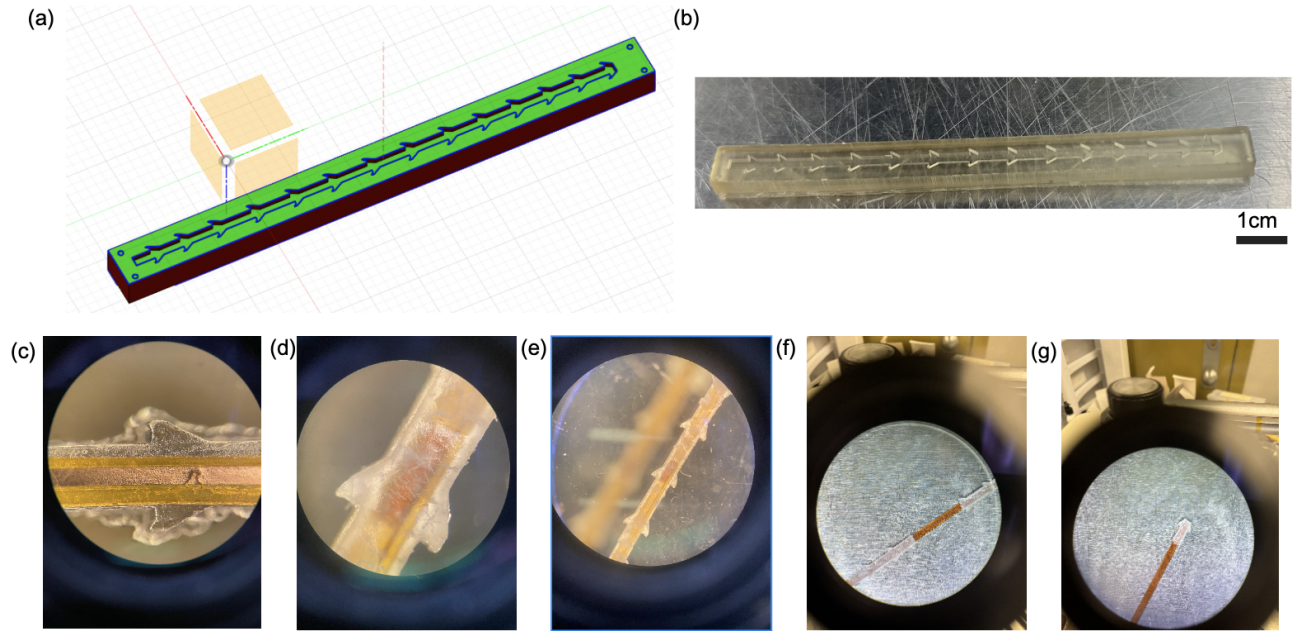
Design Evolution: (a) CAD mold with draft analysis; (b) 3D printed resin mold that PI strip can be inserted in; (c) test barb using PDMS; (d) PEG barb; (e) strip covered with multiple barbs; (f) strip with alternating barbed and bare regions; (g) final design with singular barb at one end.
